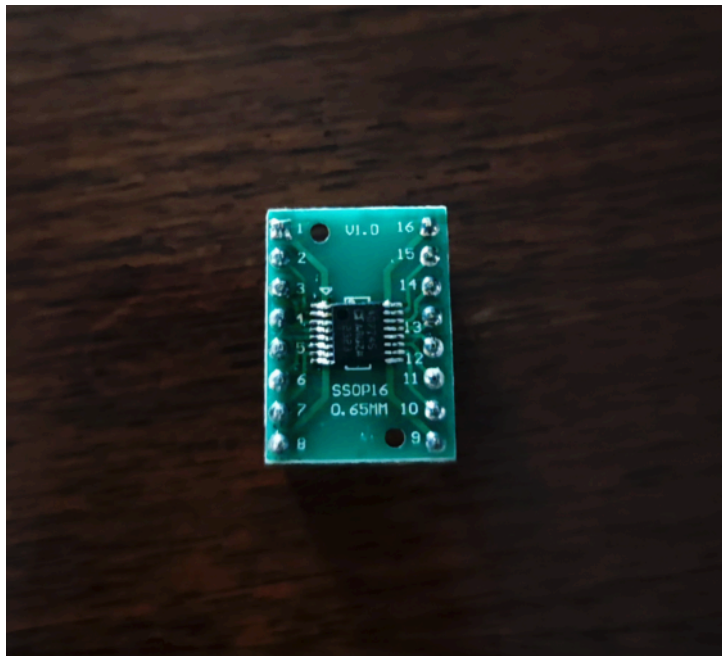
The integrated circuit AD7745 onto an SMD-to-DIP board, ready for the placement to the preboard
